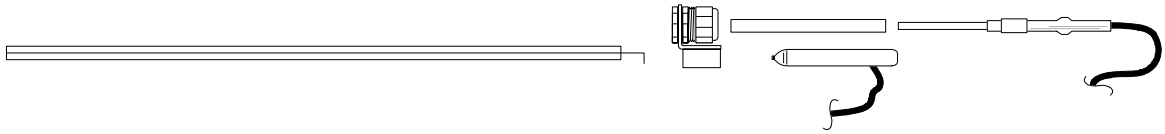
Exploded View of CS505 and CS205 Mounting
